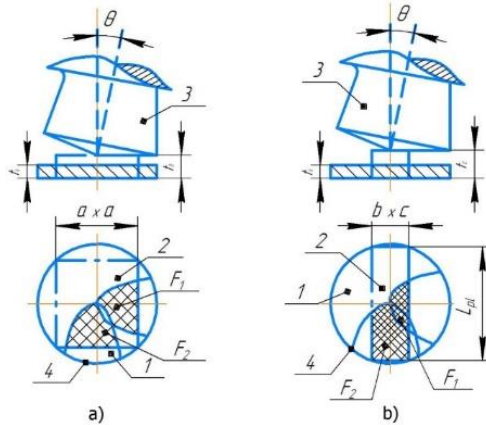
Scheme of rolling stamping of flat workpieces (circles): a) punching from a sheet; b) punching from a strip. 1 - stamped workpiece; 2 - initial workpiece; 3 - punch; 4 - matrix
